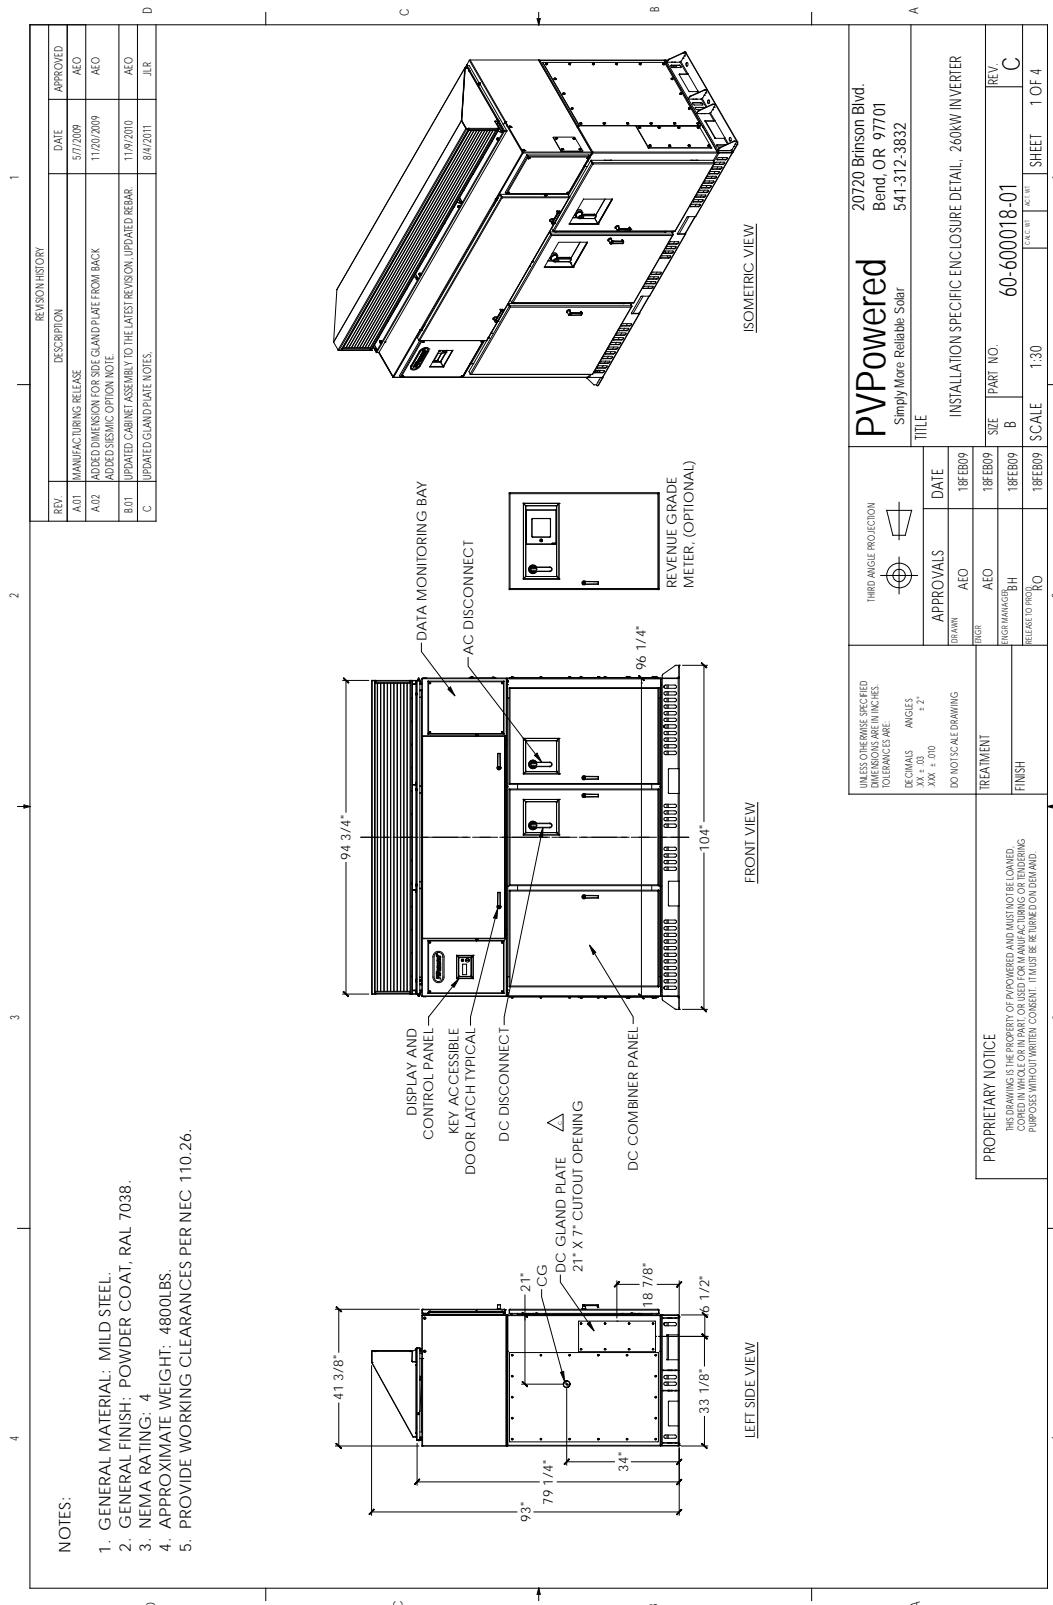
PVP250kW/PVP260kW Mechanical Drawing - View 1
